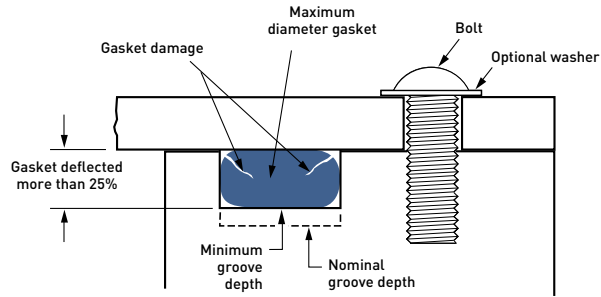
Section A-A of Assembled Enclosure Flange and Gasket (Sectioned midway through gasket and groove)
